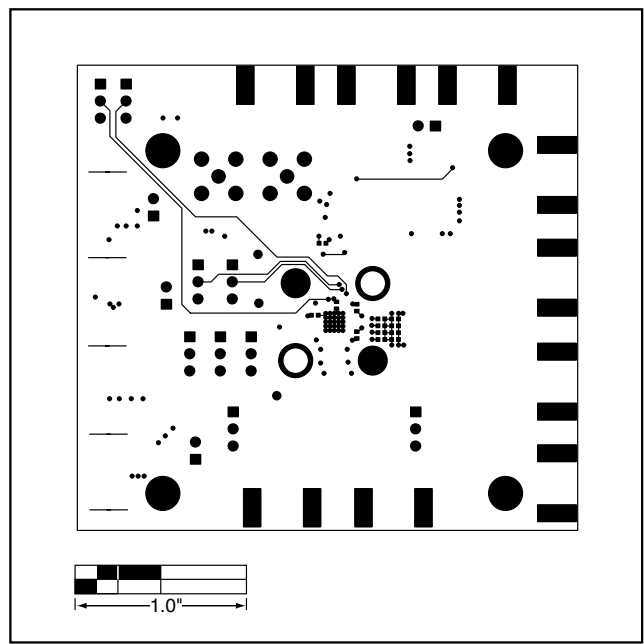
MAX3670 EV Kit PC Board Layout—Solder Side
